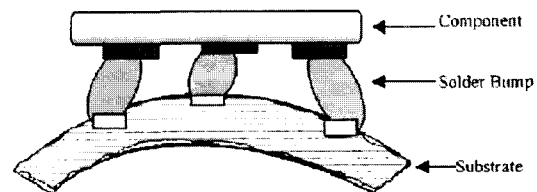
Solder Bumps (joints) subjected to tensile loading due to substrate flexing (bending) during handling of the assembly [1].
